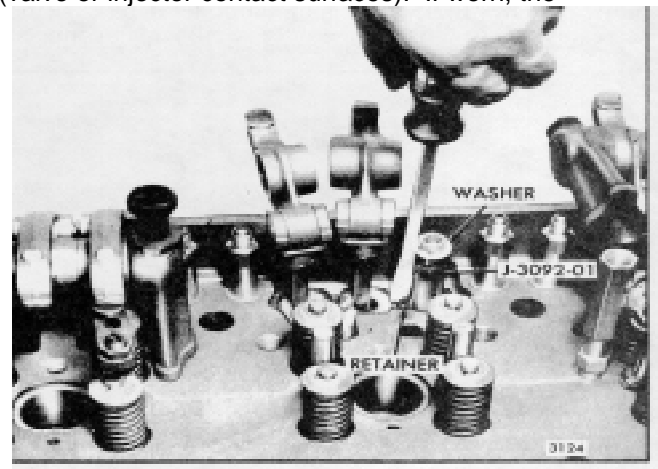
Removing Push Rod from Upper Side of Cylinder Head
